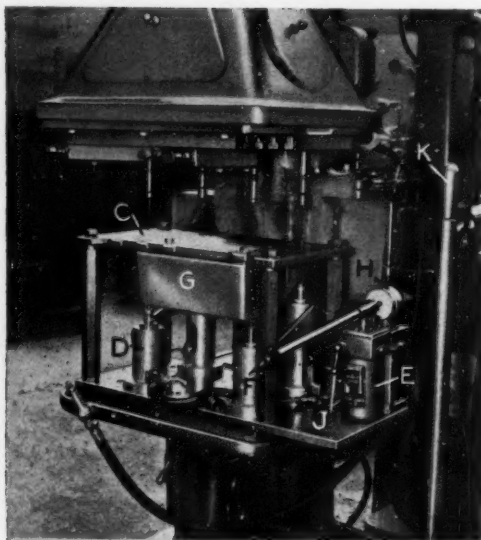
The Base Fixing Holes are Drilled in Plus Adding Machine Cases at this Set-up on a Corona 12 M.X.T. Machine. The Fixture Incorporates Hydraulic Jacks for Clamping the Work-piece, Pressure-fluid Being Supplied by the Lever-operated Pump at the Right
